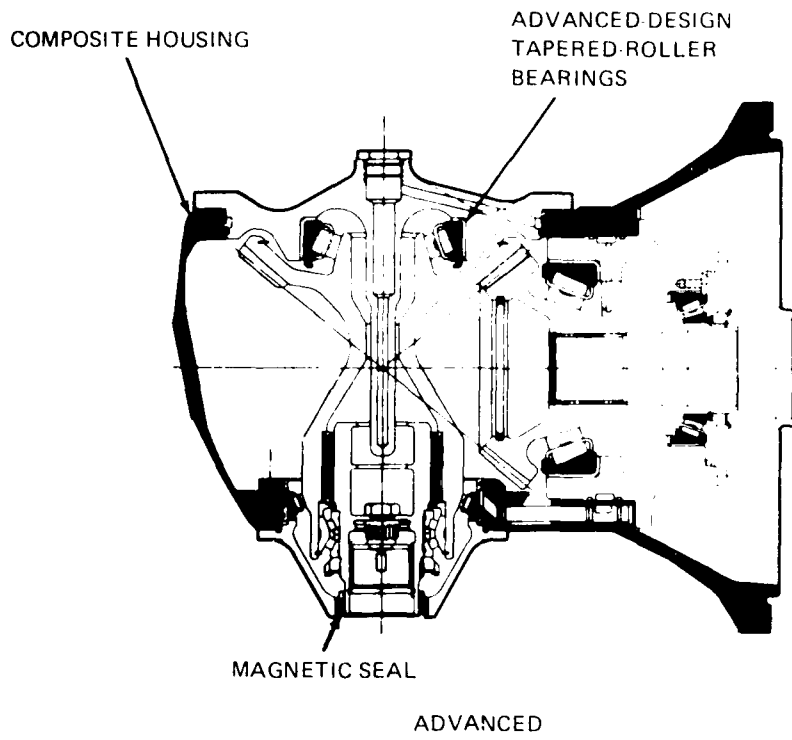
The Advanced Gearbox Assembly Is Lighter, More Reliable, and Quieter.
